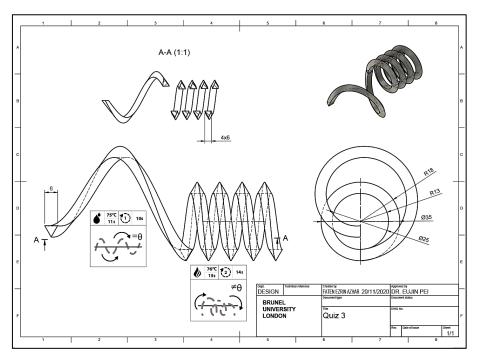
Illustration of an example of a 4D Printing toolkit used in technical drawing.
